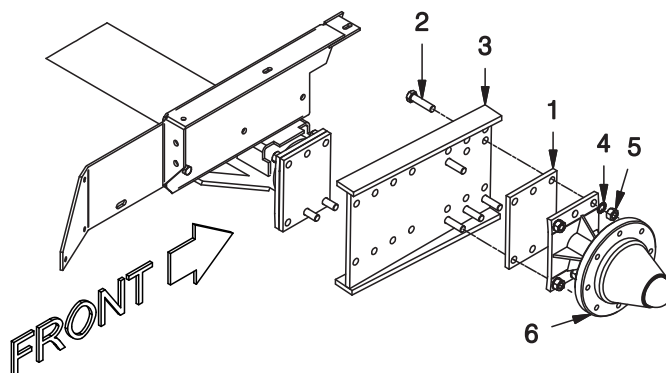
Mounting Wheel Extension, Spacer and Hub
